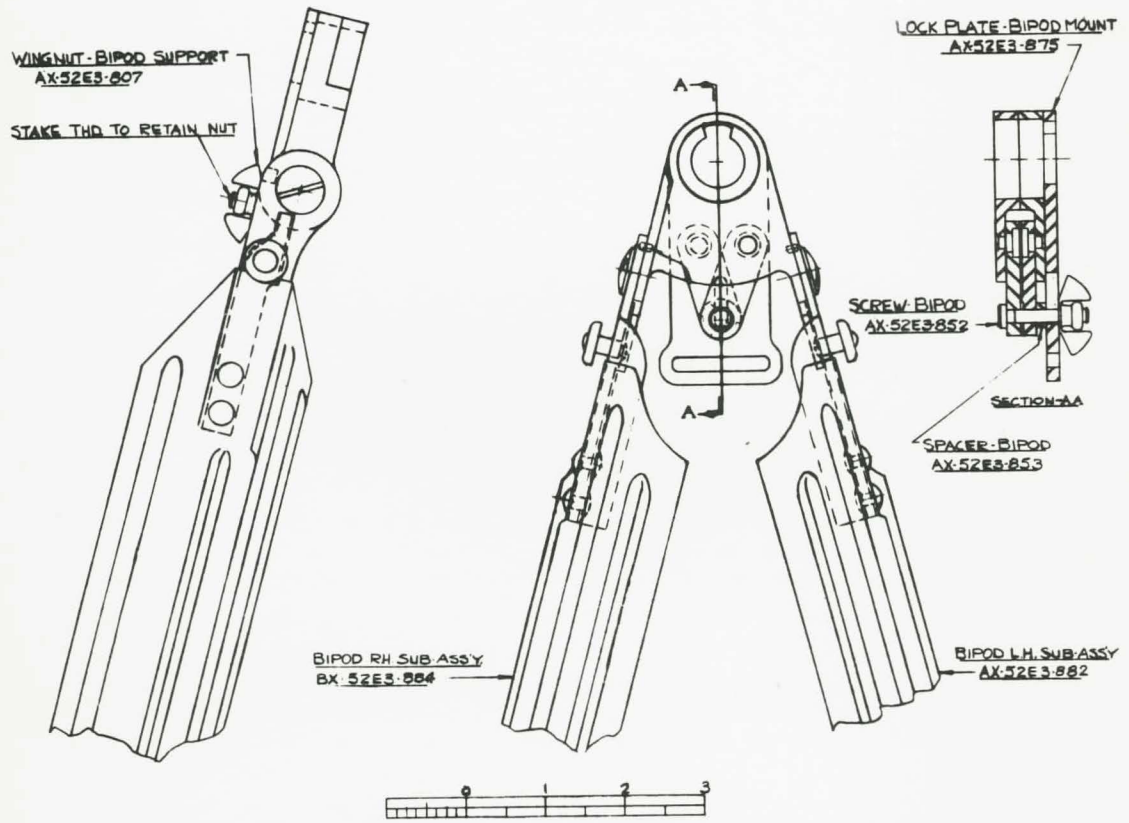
BIPOD ASSEMBLY, ST'D.
